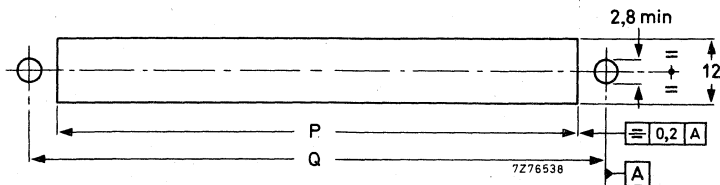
Panel cut-out for the male part; see Table 4 for dimensions P and Q.
